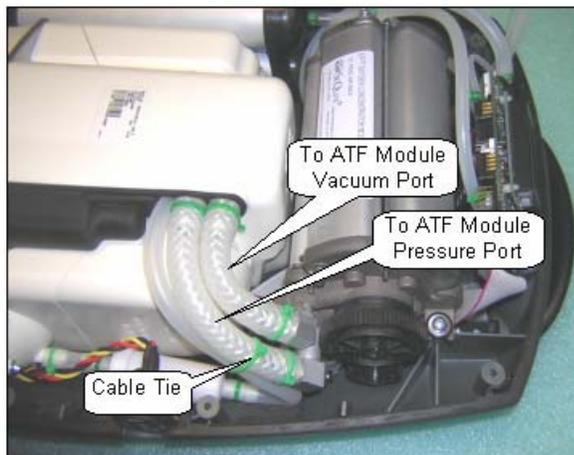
Removal of ATF Module Pressure and Vacuum Tubes.
